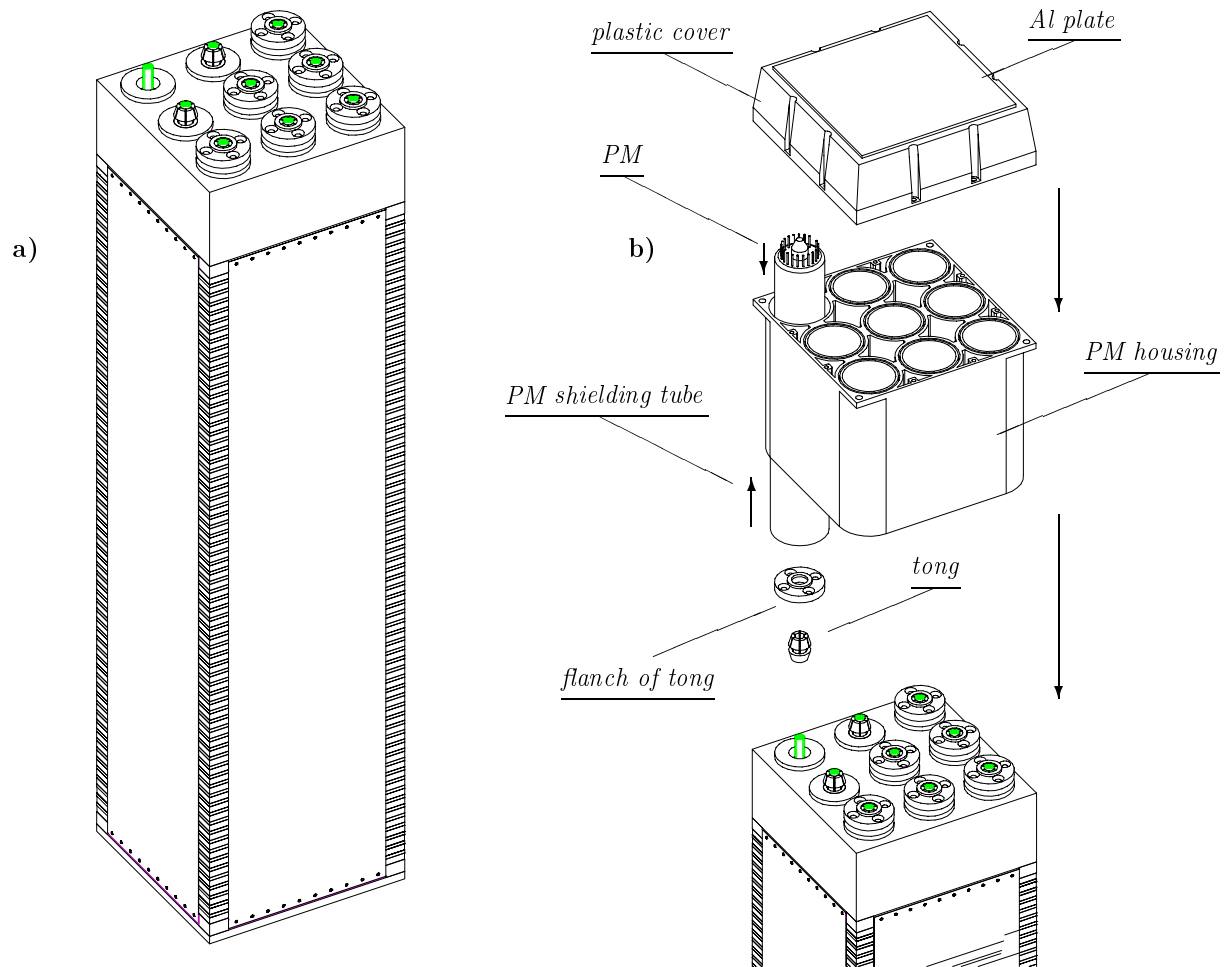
Assembly of the inner section module: shown are a) the assembled stack with 6 from 9 formed fiber bundles, and b) the read-out part assembly. For more details see the text.
